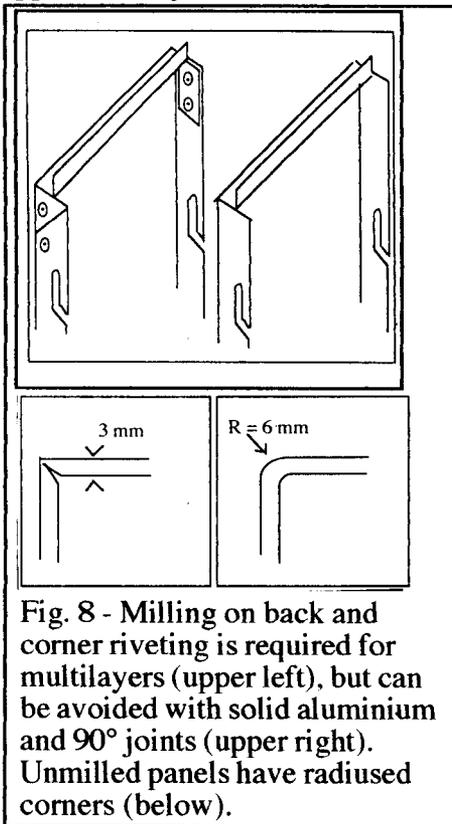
Milling on back and corner riveting is required for multilayers (upper left), but can be avoided with solid aluminium and 90° joints (upper right). Unmilled panels have radiused corners (below).
